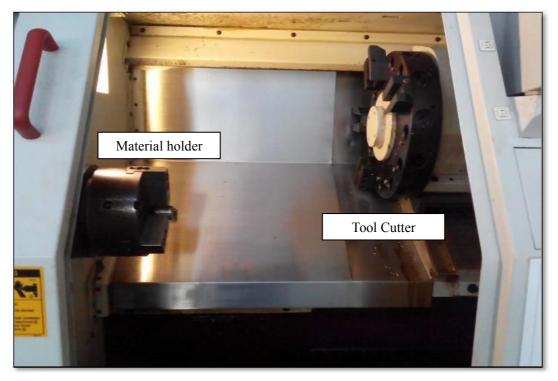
Utilizing CNC Lathe Machine for tool fabrication
